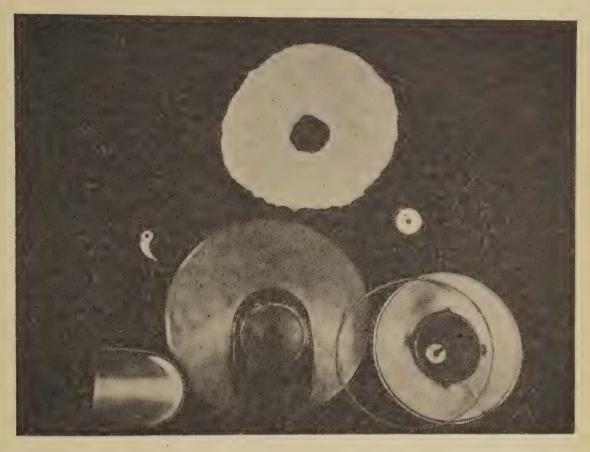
Photograph showing separate parts of cover and strainer device of the Haymaker pail.
